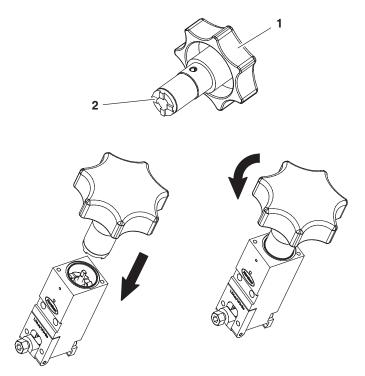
Using the cartridge tool to loosen the cartridge assembly
